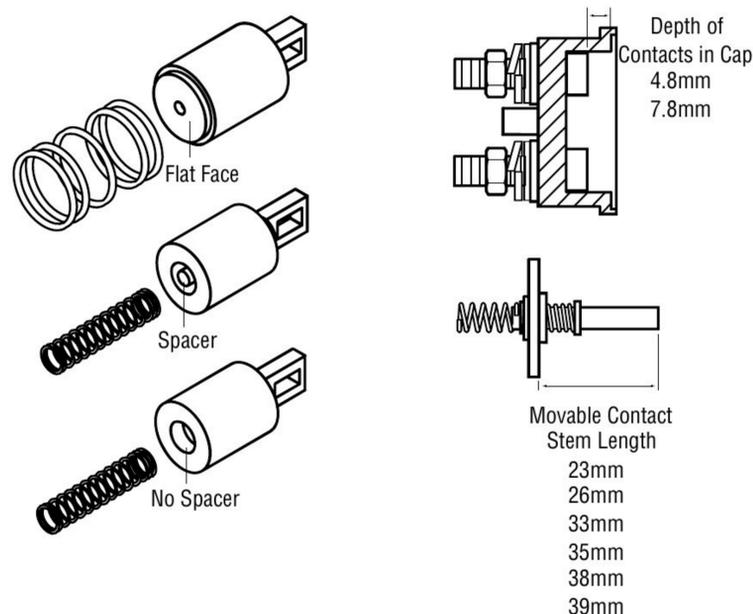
The different plunger assemblies, cap assemblies and movable-contact assemblies on “crimp cap” solenoids for Mitsubishi are not interchangeable, although the solenoids themselves are interchangeable as complete assemblies.
